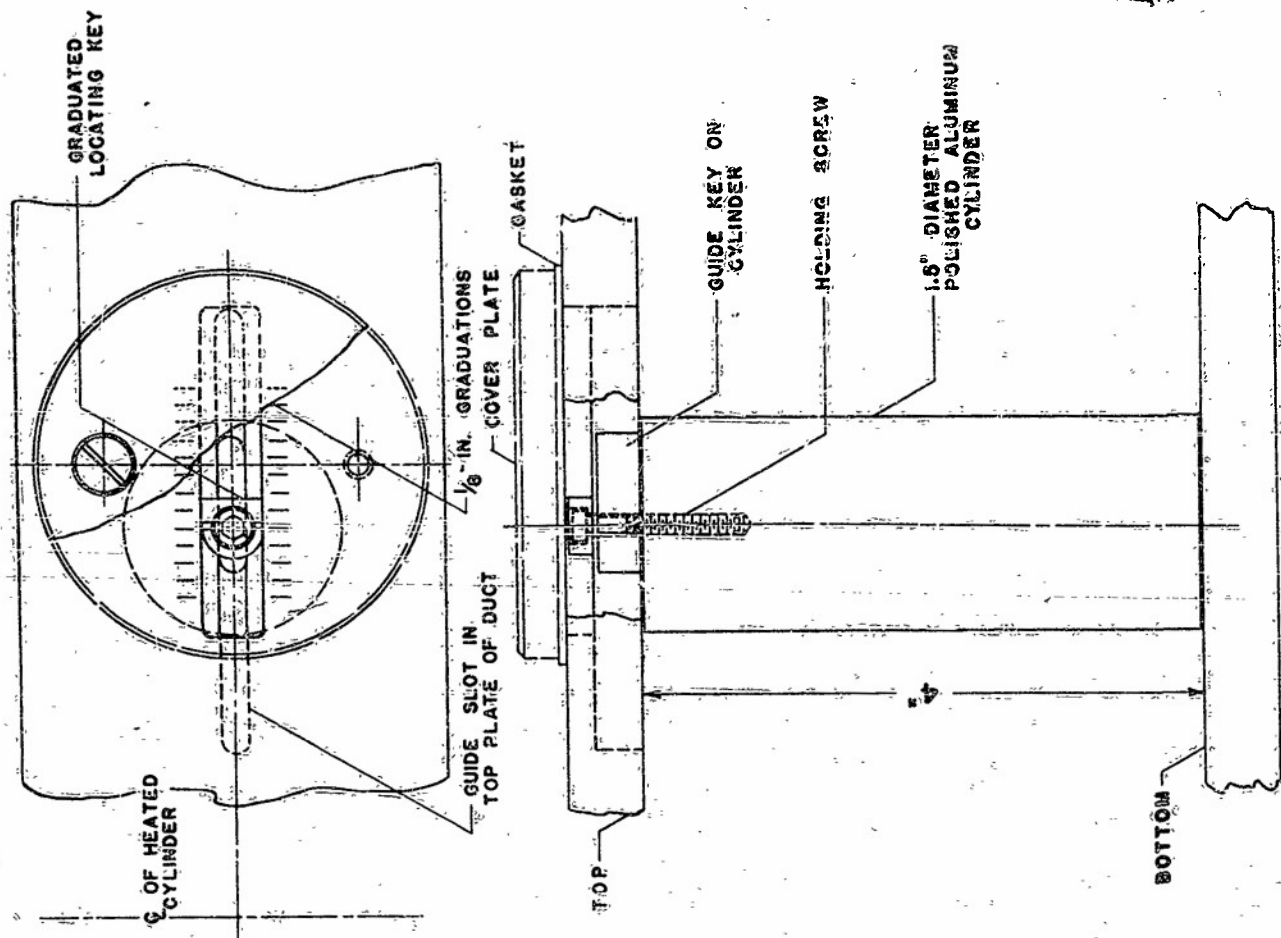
SKETCH SHOWING METHOD OF LOCATING AND HOLDING DUMMY CYLINDERS FOR IN-LINE AND STAGGER CONFIGURATIONS
